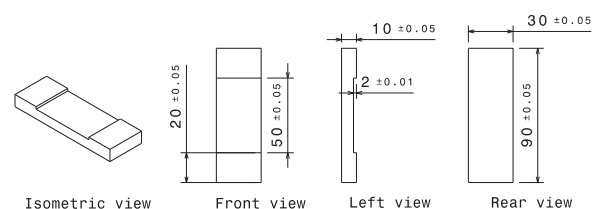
Dimensions of the substructure of the specimen in millimeters.
